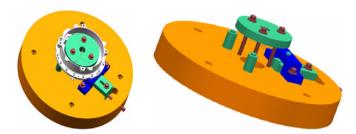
Machining fixtures of aircraft-used bearing housing.
